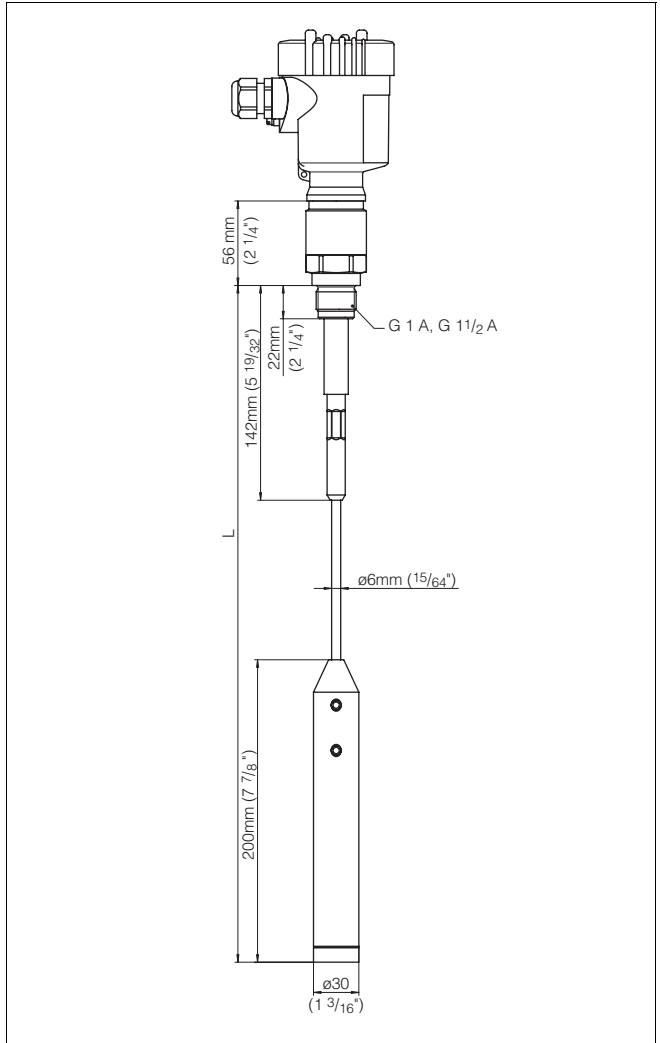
VEGACAP 65 - Threaded version G1 A
